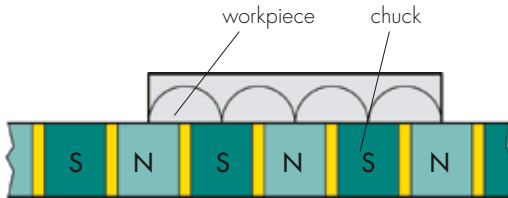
Force line pattern where workpiece thickness > pole spacing
